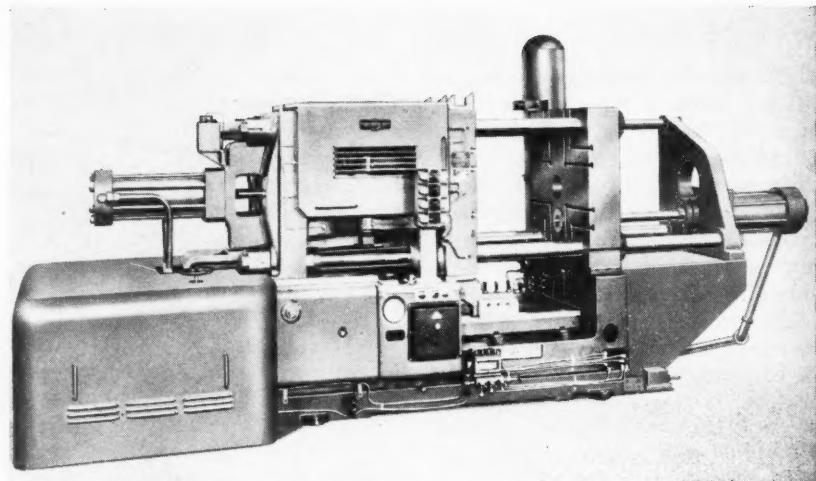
Reed-Prentice die-casting machine with high-pressure cold-chamber attachment
